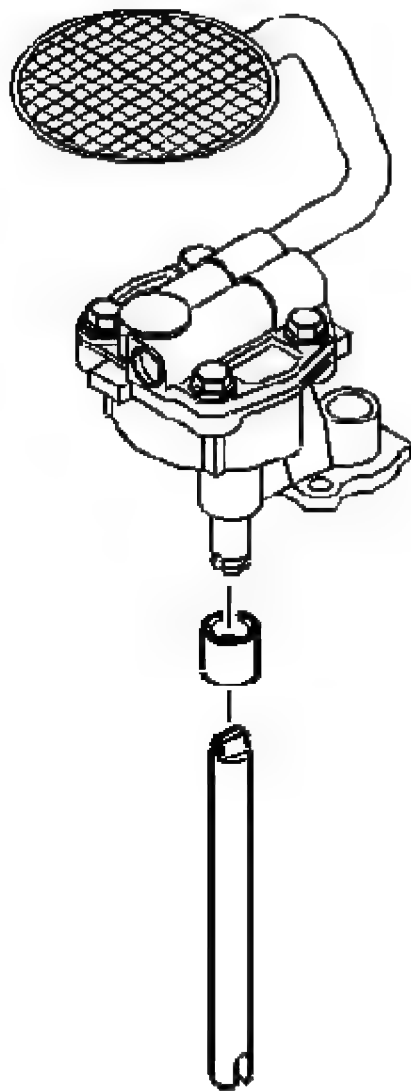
View Of Oil Pump Driveshaft & Oil Pump Driveshaft Retainer
